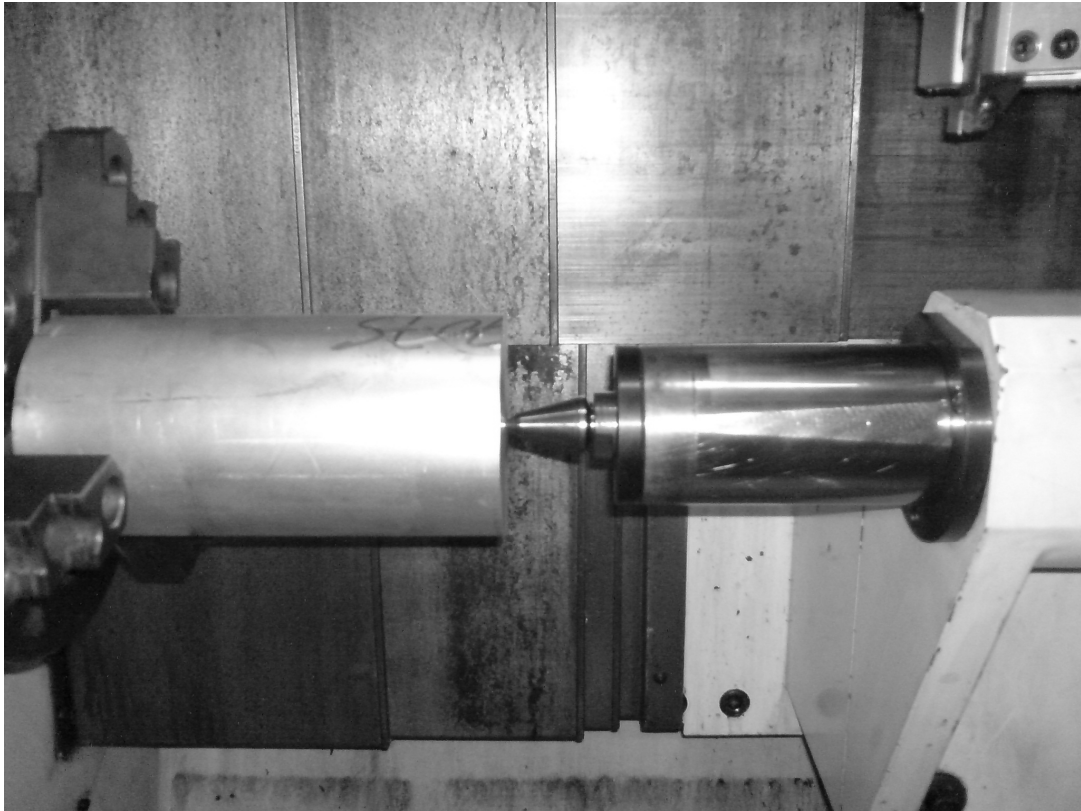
Aluminium bar being held in place by the chuck and the tailstock
